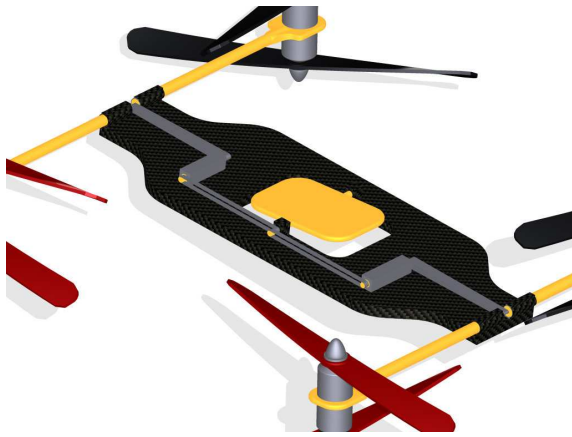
A closer model of the servo and gearsystem of the Morphing Quad Rotorcraft .
